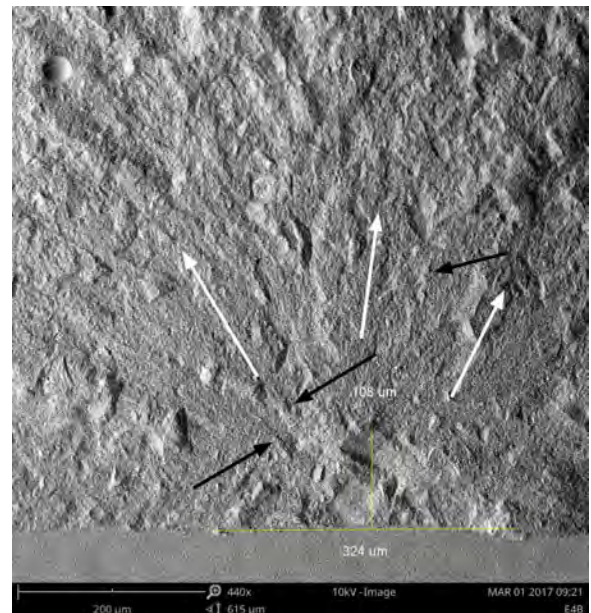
Example of a surface crack. Yellow lines indicate the width and depth of the crack at the fracture origin. Black arrows indicate direction of crack propagation away from the crack origin. White arrows indicate twist hackle marks on the fracture surface.
